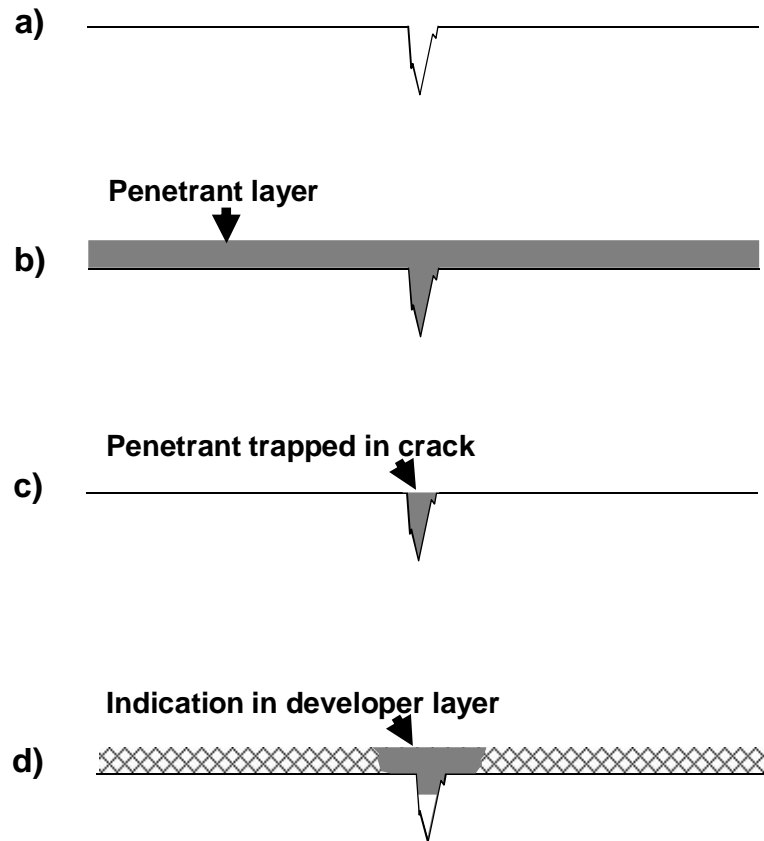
Basic steps in the penetrant inspection: a) clean empty crack b) after penetrant application c) after removal of surface excess penetrant d) indication ready for inspection. After Lovejoy [18].
